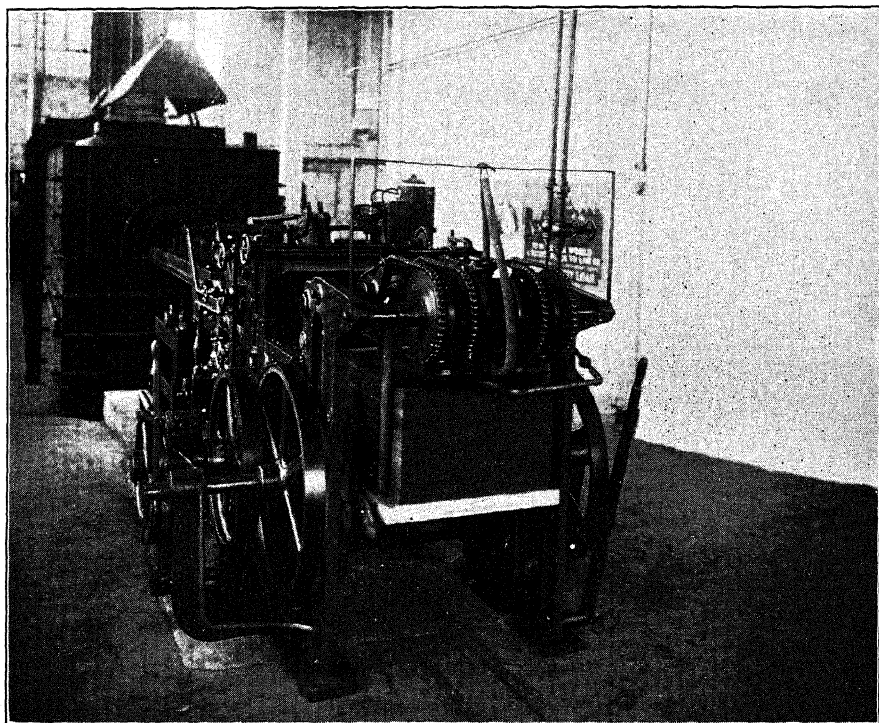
SHEET-FEEDING MACHINE AND COATING ROLLS.
